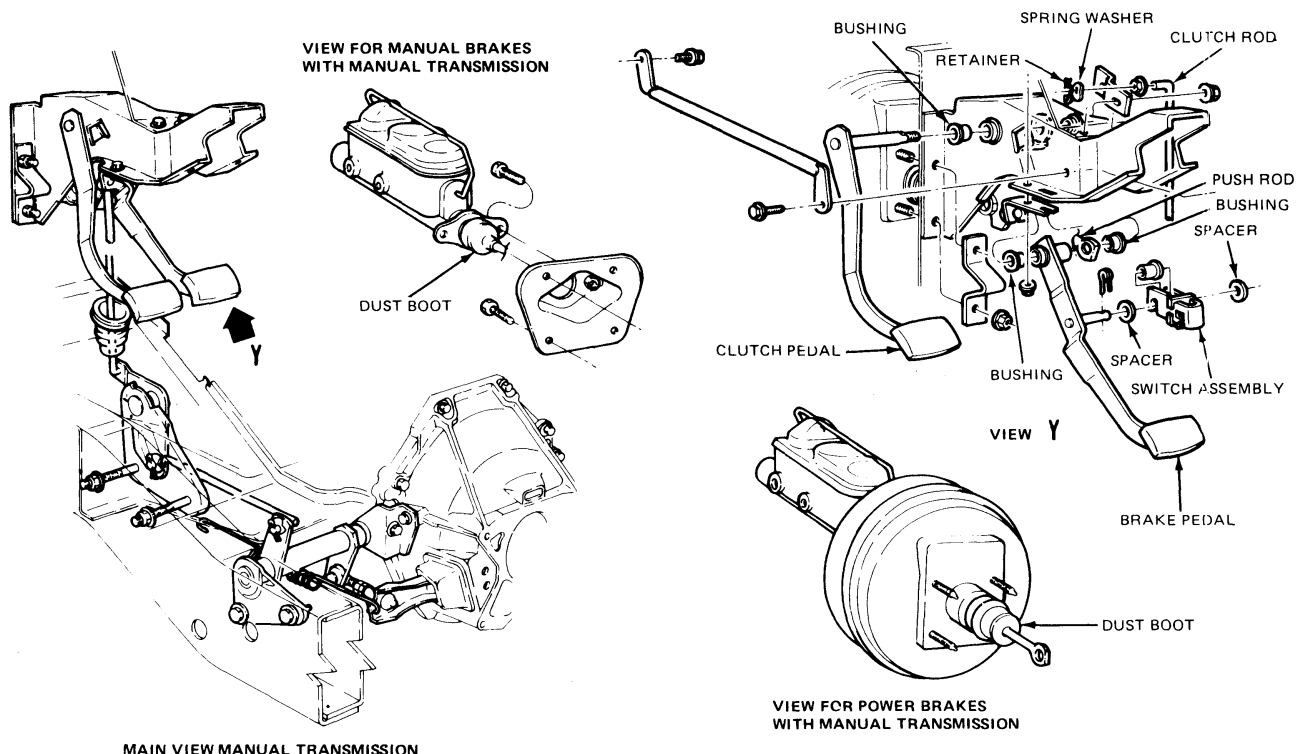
Brake Pedal Exploded Views—F-100—F-350 and Bronco
